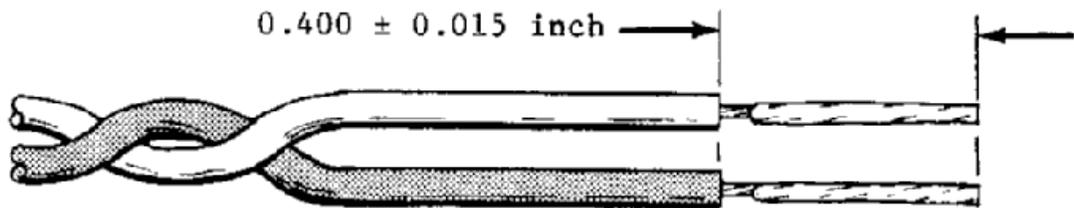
Trimming Dimensions for AWG 28 and 30 Wires
